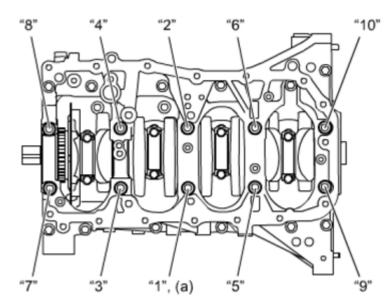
Identifying Crankcase Bolt Tightening Sequence Courtesy of SUZUKI OF AMERICA CORP.
